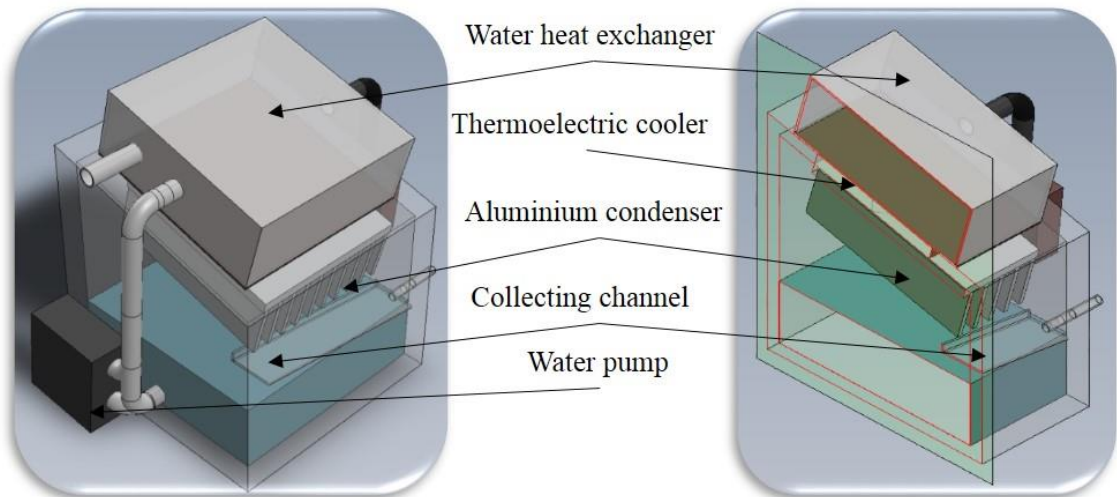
Design drawing of the assembled system (left) and cross-section views of the system (right).
